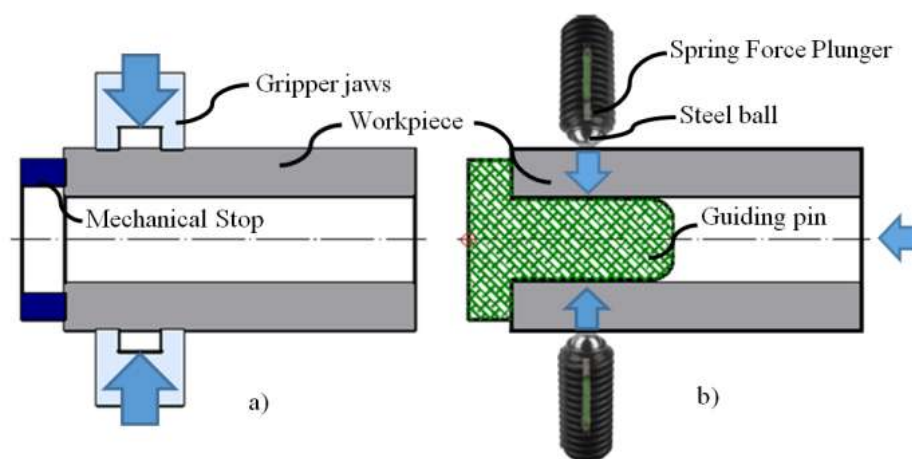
Schematic representation of a cylindrical workpiece a) gripping with jaws b) gripping with spring force plunger
